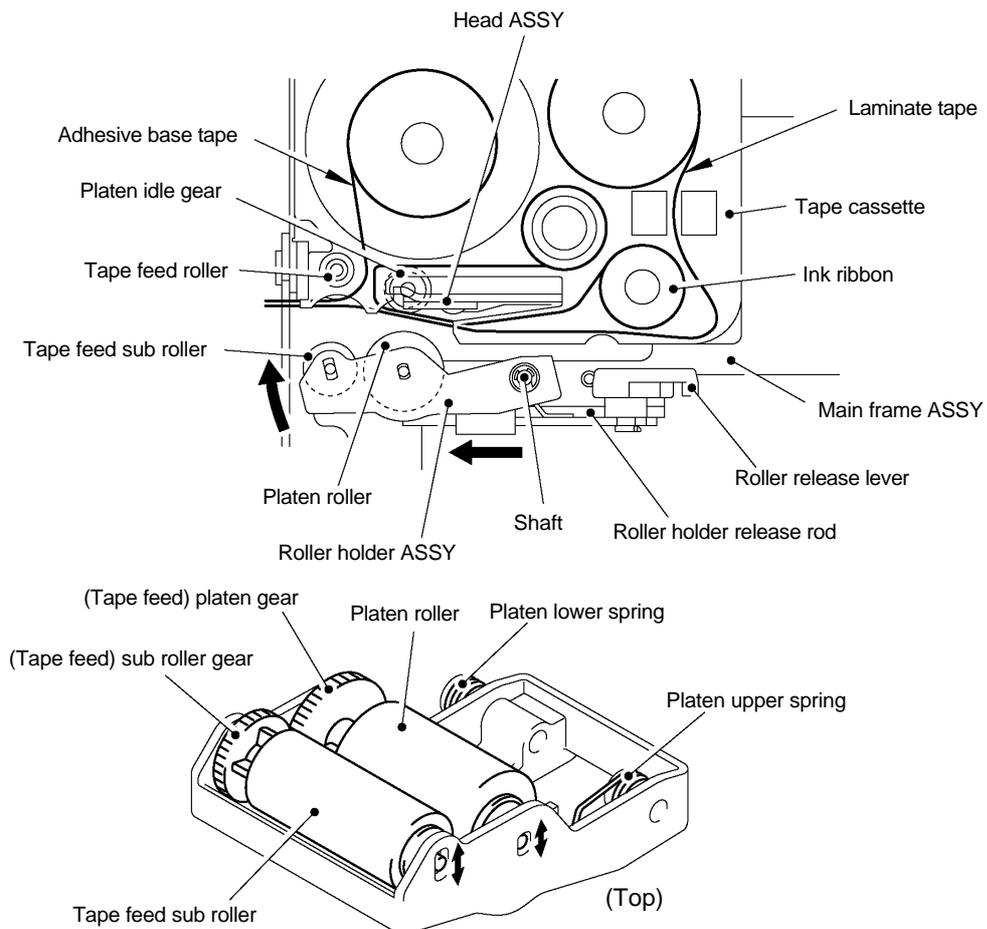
Roller Holder ASSY Setting & Retracting Mechanism
